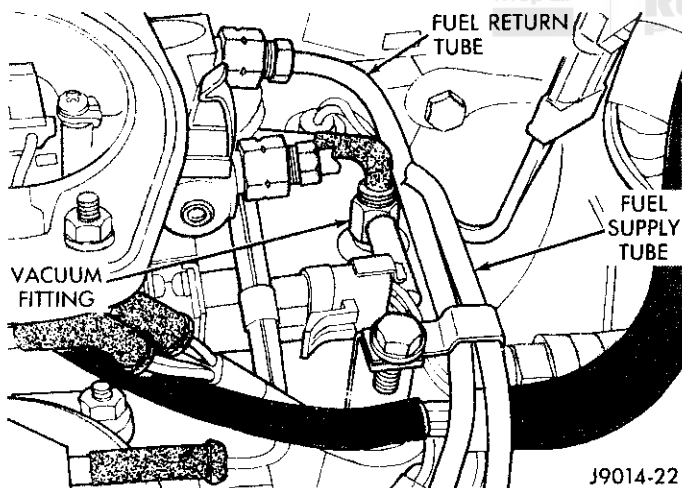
Fuel Tube and Vacuum Fitting Connections
